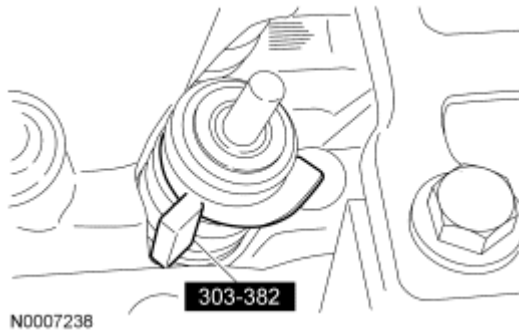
Installing Special Tool (303-382) Between Valve Spring Coils
